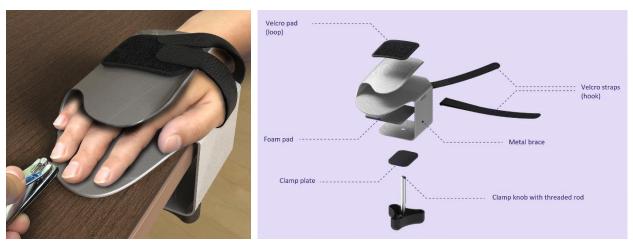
Hold-My-Hand Assistive Brace and exploded view parts diagram. Renderings by Suochun Fang, 2022.
